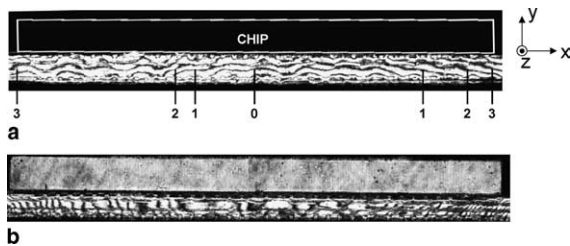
Residual warpage measurement after solder reflow process: (a) SP (Sn/37Pb) PCB; (b) SAC (Sn/3.0Ag/0.5Cu) PCB.
